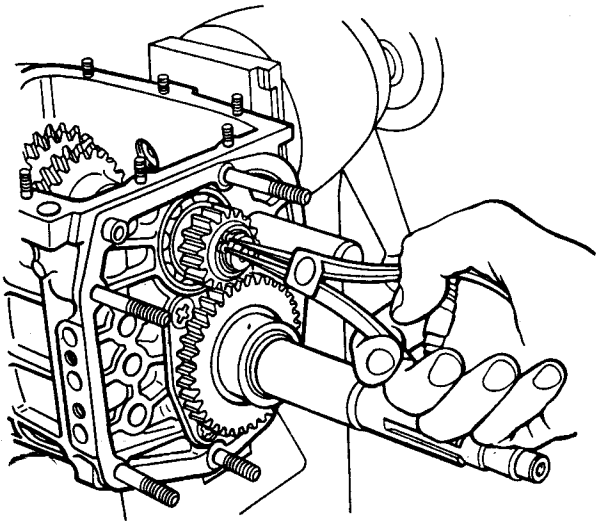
Removing Reverse Gear Lockring from Countershaft
